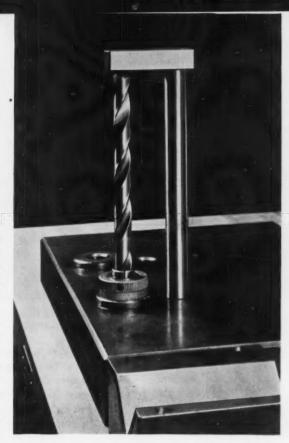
Typical bar type gage for pre-setting cutting tools before they are mounted on the transfer machine. Over-all length is increased until drill point contacts the gage bar.
